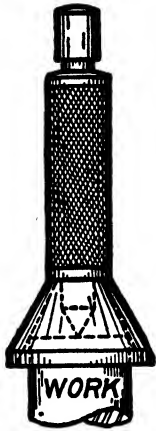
Using a bell center punch to locate a center. (South Bend Lathe Works)
